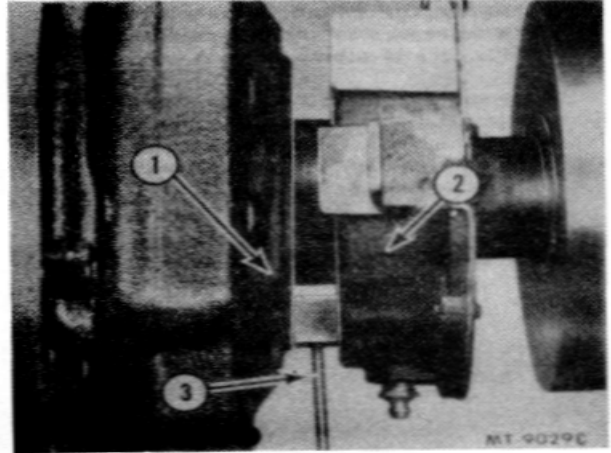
Checking Release Bearing Adjustment (Without Clutch Brake) (Dana Clutch)
